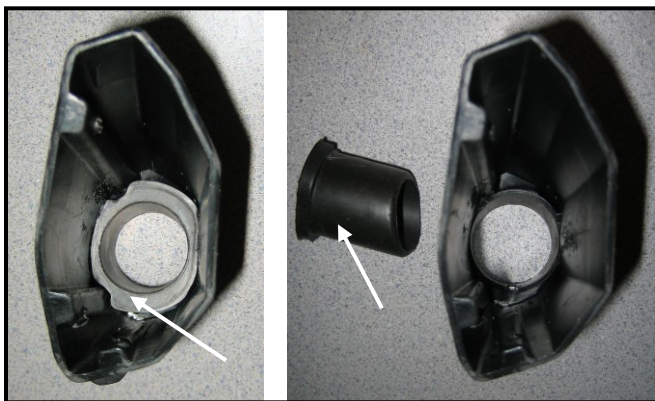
White arrow identifies rubber grommet installed (Left) & removed from end cap (Right).
